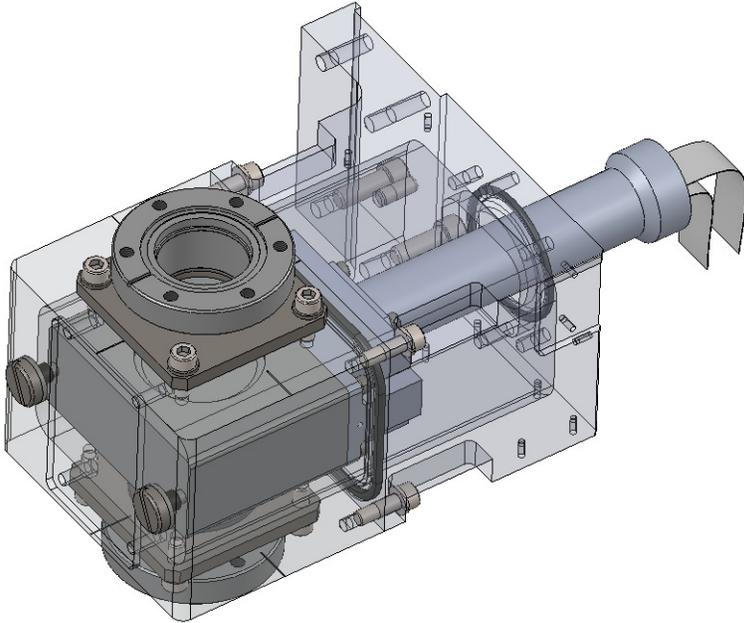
Vacuum housing with sensor extended (in beam position), engaged on alignment pins
